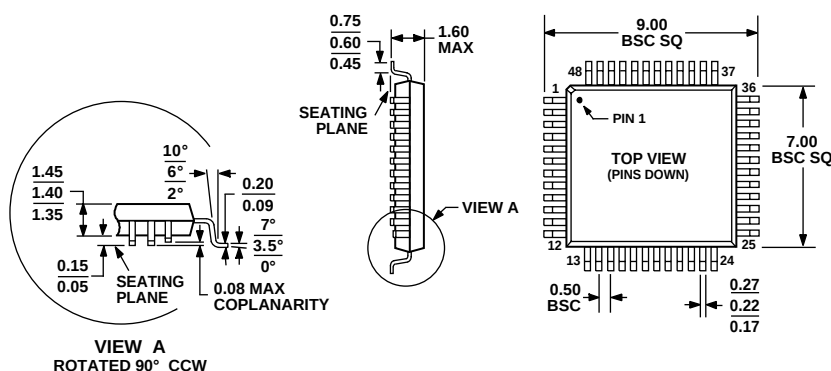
48-Lead Low Profile Quad Flat Package [LQFP]
